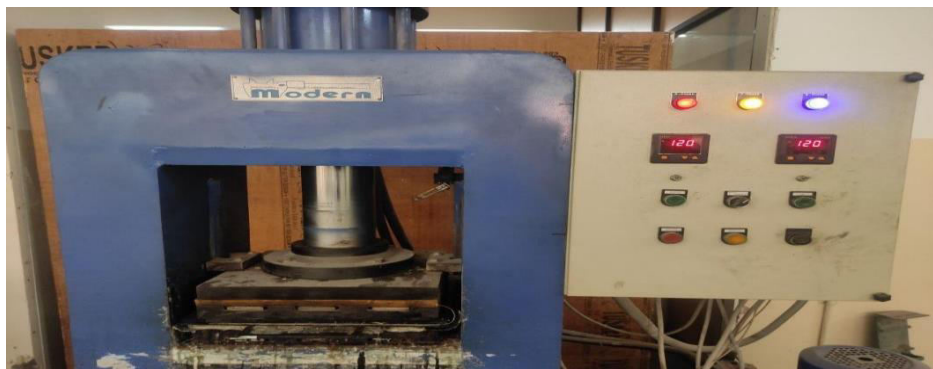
Compression Moulding (compress the plate in 2 to 3 hrs)
